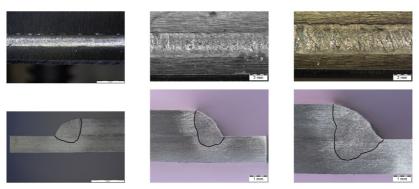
Weld seam surfaces and cross sections of linear Al 6082 fillet welds made with BrightLine Weld. The flange position is given by b = 3 mm and the sheet thickness is given by 1 mm at v = 10 m/min (left), 1.5 mm at v = 8 m/min (center) and 2 mm at 5 m/min (right).
